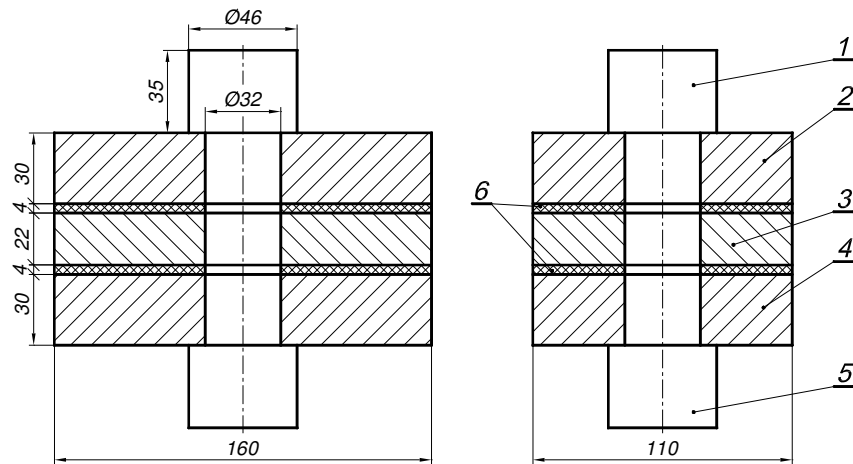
Geometry of foundation bolted joint model with the polymer-steel chock: 1 – top pressure stamp, 2 – top plate, 3 – steel chock, 4 – bottom plate, 5 – bottom pressure stamp, 6 – polymer chock
